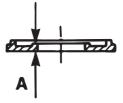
Seal (pos. 207) - A = Min. 1.5 mm
